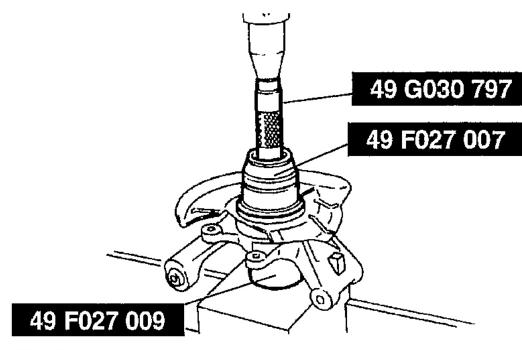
Installing New Wheel Bearing With Silver-Colored Oil Seal Side Facing Toward Vehicle Courtesy of MAZDA MOTORS CORP.
